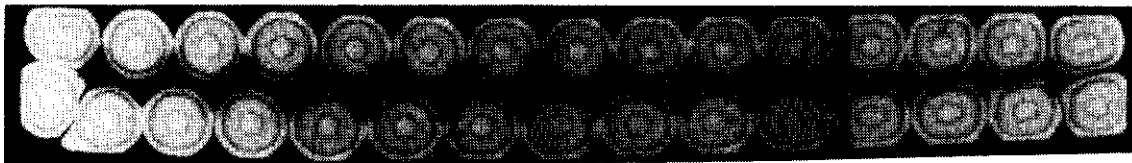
23 strand and 30 strand keystoned cable cross sections.
